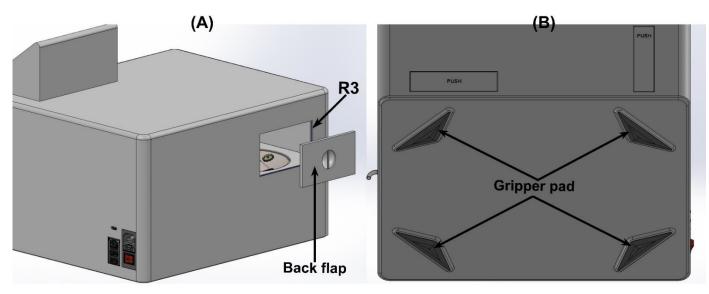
(A)Back isometric view showing back flap, (B)bottom isometric view showing gripper pad of MSCs extraction automatic device.
